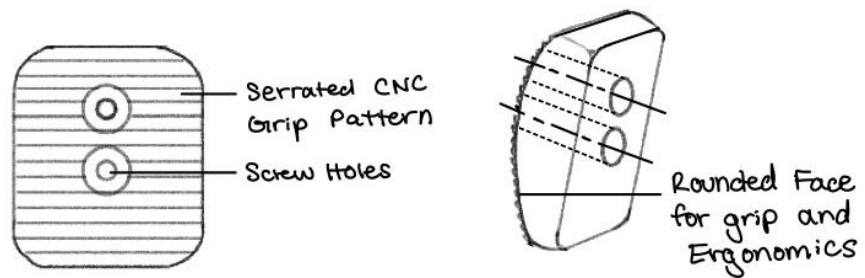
Sketches for revised Aluminum V2 with a CNC milled grip pattern instead of a smooth surface with adhered grip.
